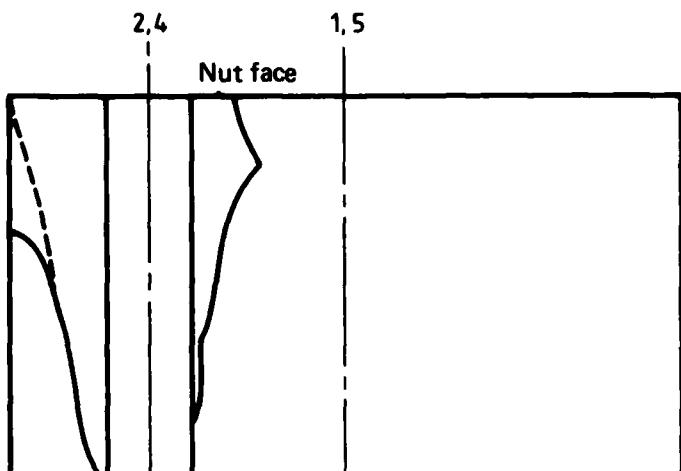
(c) FRACTURE SURFACES: SPECIMEN TYPE (C)
